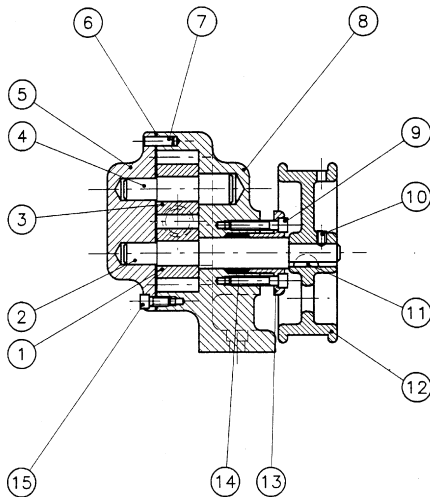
The gear pump assembly (adopted from Farmer et al. [1] with permission)
